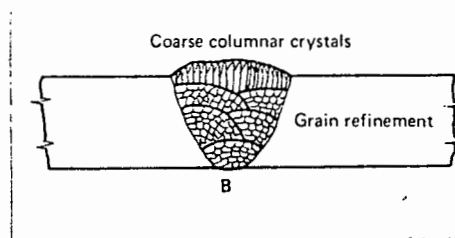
Structure of a typical multi-run arc weld
